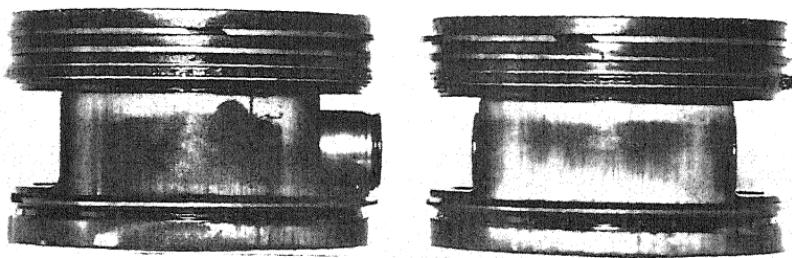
Typical Piston of the Bristol Pegasus III, M.3 Engine (Supercharged), showing Non-thrust and Thrust Sides, after 100 Hours' Bench Test
